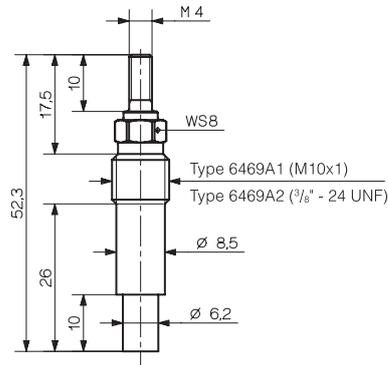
Dummy sensor Type 6469A1 (M10x1)
